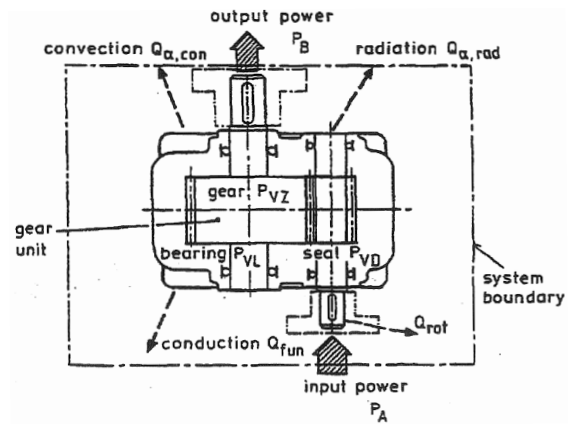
Fundamental heat dissipation mechanisms in a gear transmission [28]
